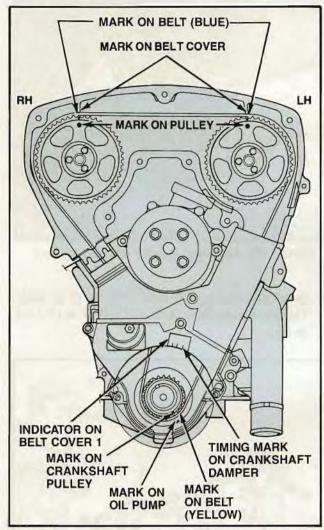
Timing Belt Components (Marks When No. 1 Cylinder is at T.D.C. on Compression Stroke)
